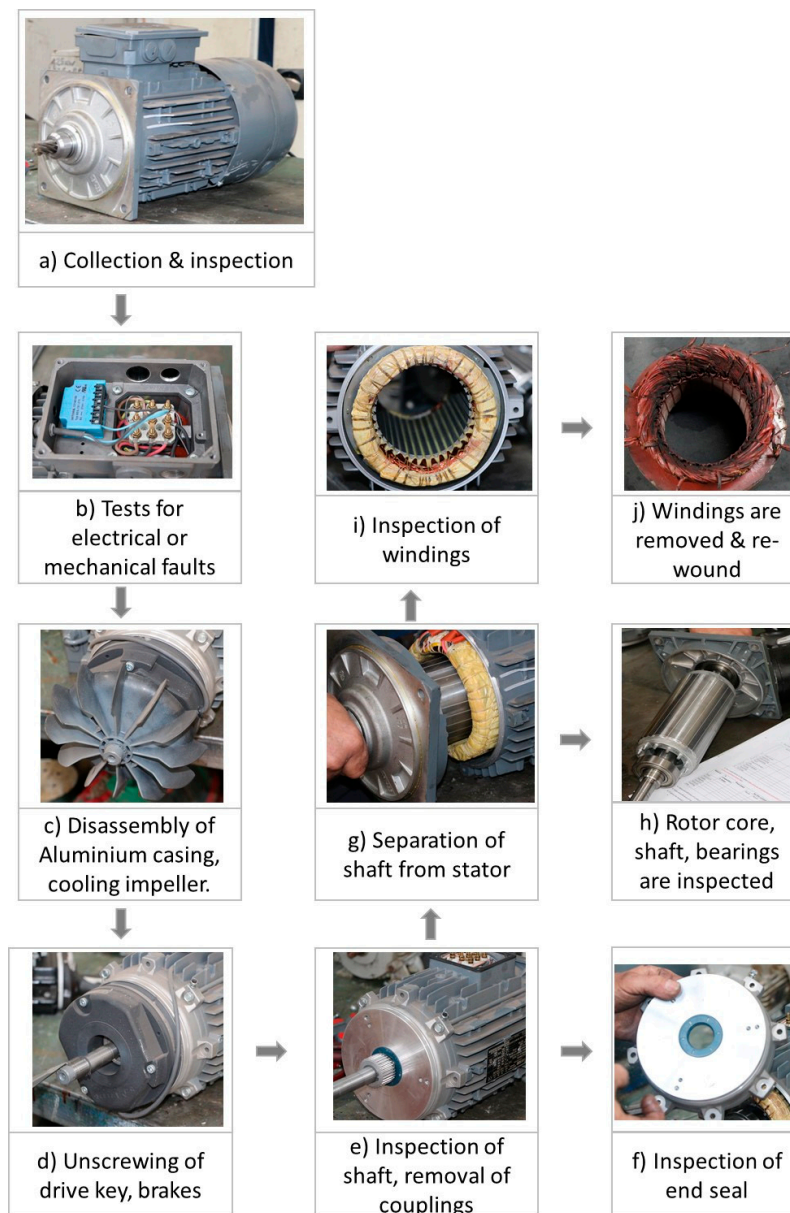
Overview of the key components and disassembly steps for a brake motor. The details provided in the figure were obtained through observation of three disassembly processes at an electric motor repair/remanufacturing facility.
